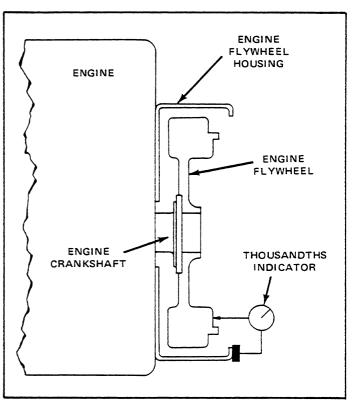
Checking the Driving Ring Surface of Engine Flywheel.
